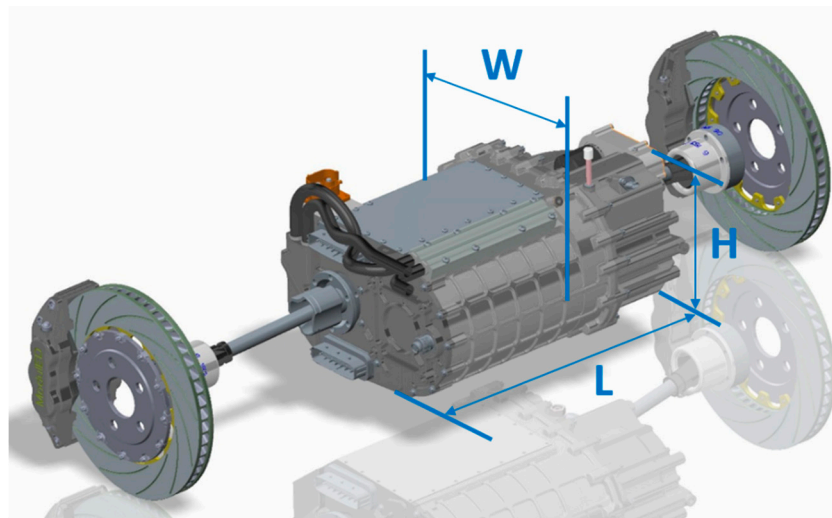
CAD drawing and main dimensions of developed powertrain module.
